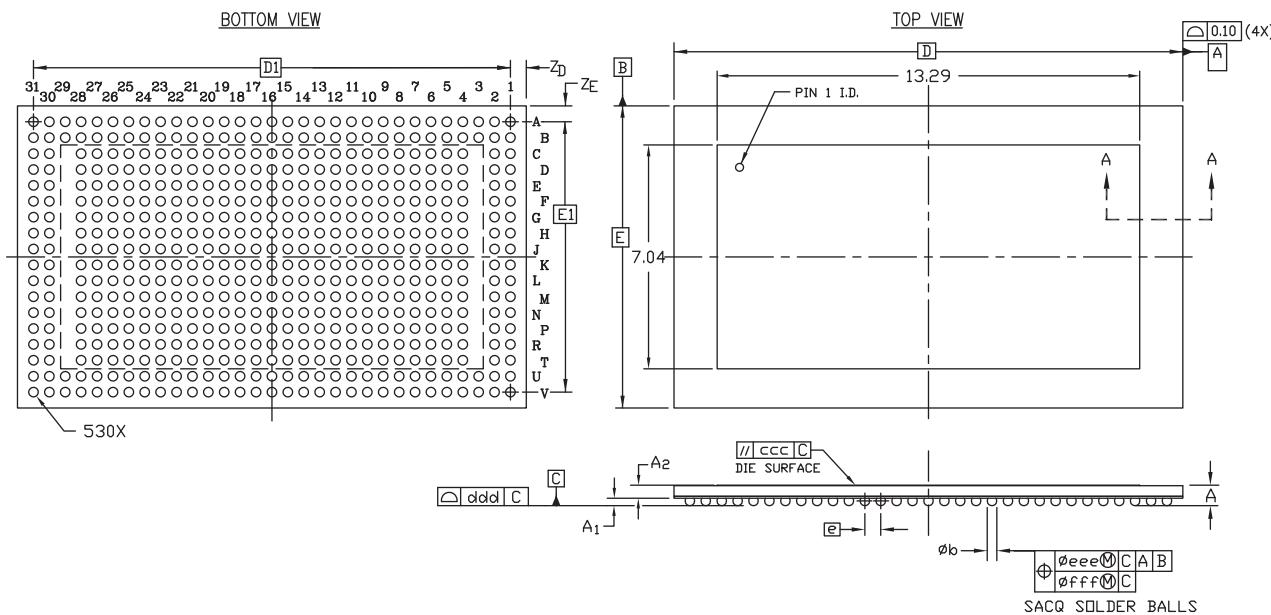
Package Dimensions for UBVA494 (XCZU1)
